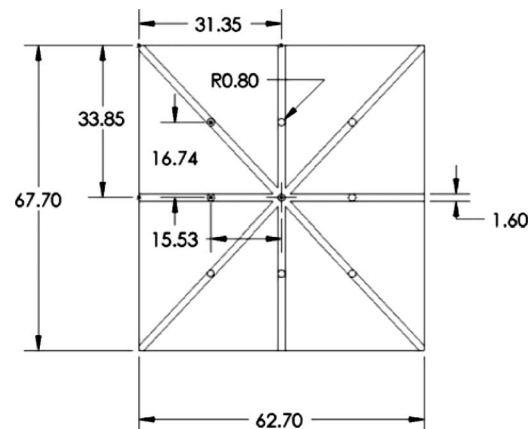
Bottom view of the thermocouple distribution and geometrical dimensions (in millimeters) of the copper plate
